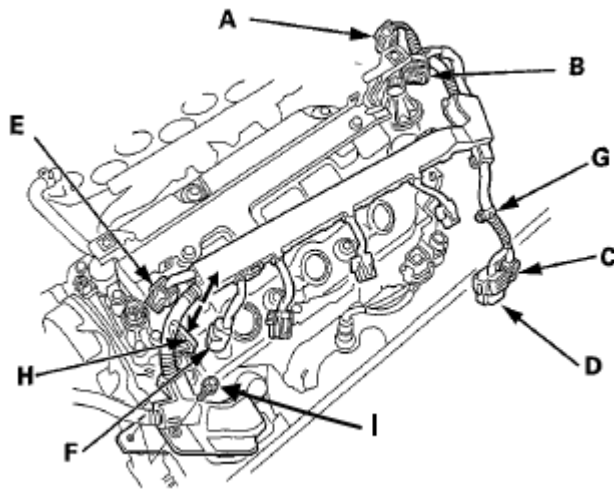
Identifying Exhaust Gas Recirculation Valve Connector & Harness Clamp
